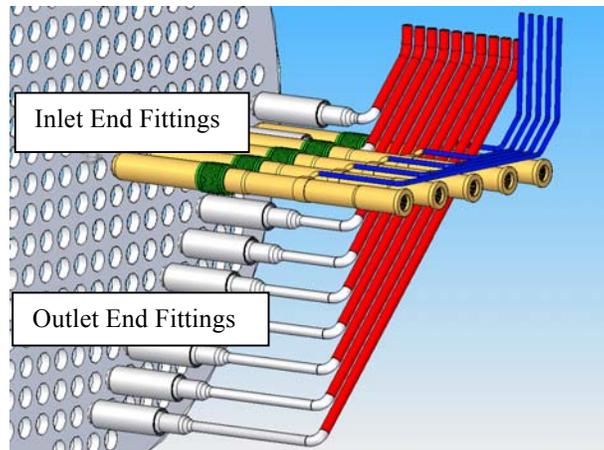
The assembly of inlet and outlet end fittings and feeders.
